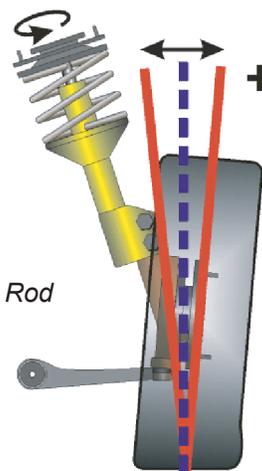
76, Rotate the Strut Rod Piston to Check for a Bent Rod
